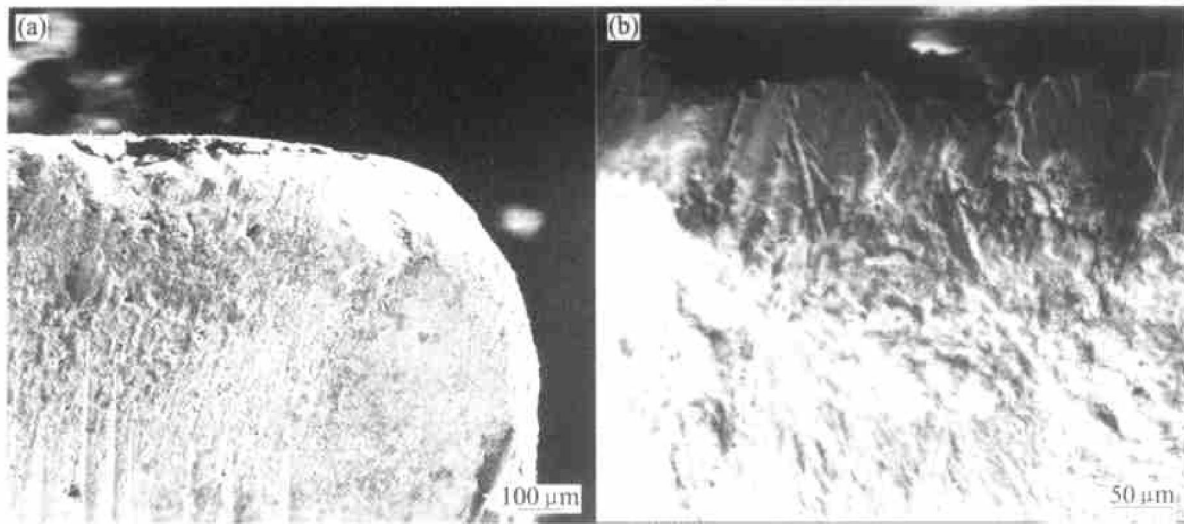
Rake (a) and flank (b) surface morphologies of YW1 cemented carbide tool after turning at a speed of 54.25 m/min for 7.5 min
